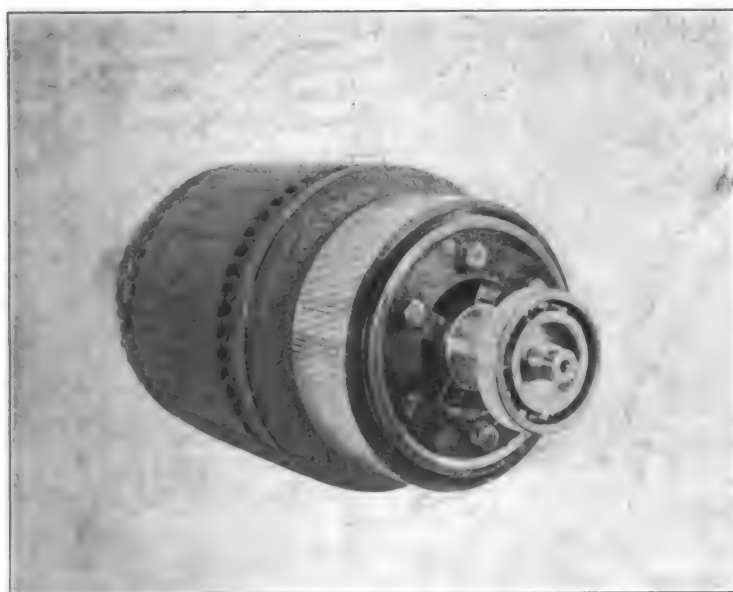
BALL BEARING APPLIED TO SHAFT OF ARMATURE.
